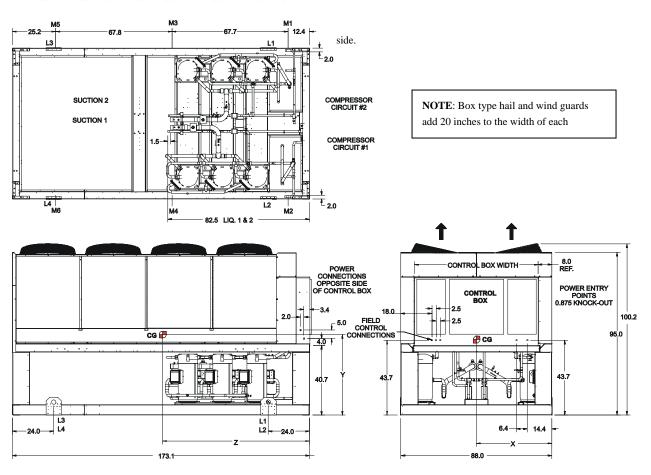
, Dimensions, AGZ 075CB - 100CB, w/ Remote Evaporator
